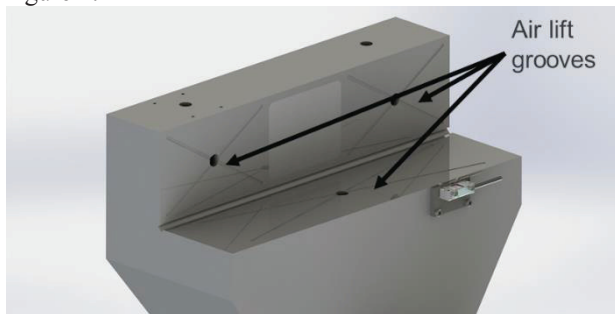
View showing the bottom of the Z axis carriage and the integrated air-lift grooves for the air bearing. Other axes are similar.
